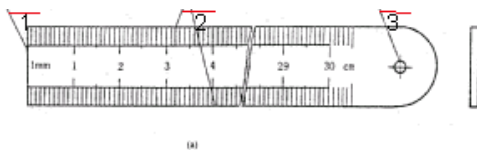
Schematic diagrams of common steel ruler, where: 1. end edge; 2. side edge; 3 suspension hole.
